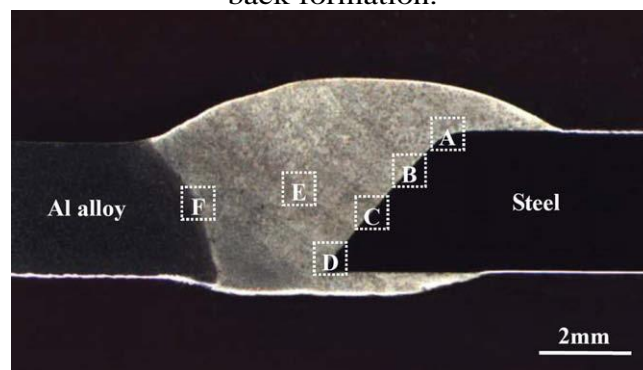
Typical cross-section of the aluminum–steel butt joint with Al–Cu filler metal.
